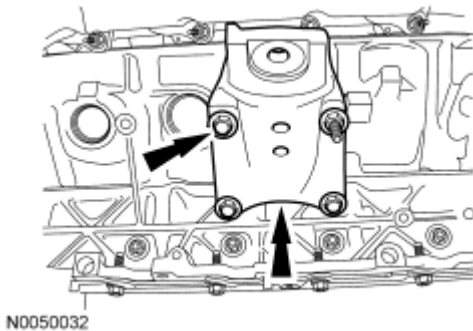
Locating RH Engine Support Insulator Bracket Bolts & Stud Bolt
